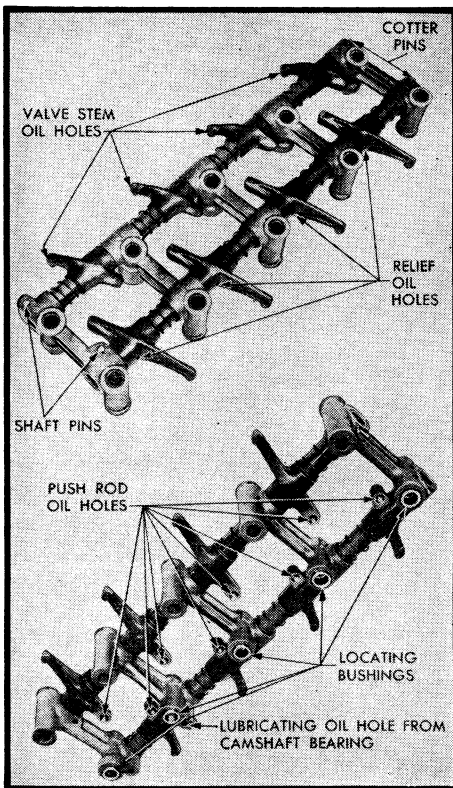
Top and bottom view of double rocker arm assembly. 1954-58 V8 engine
